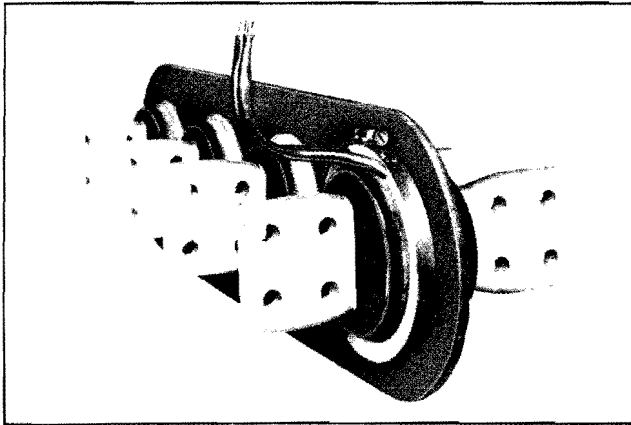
Cooling Coil Positioned Over the Bushing Flange
